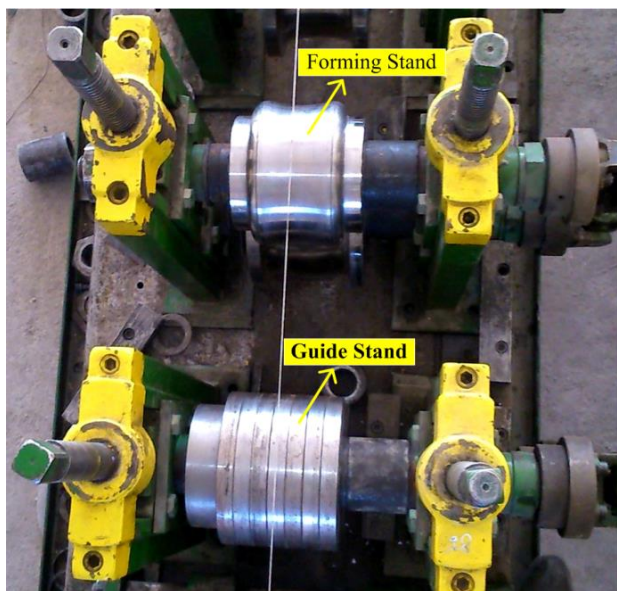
Roll forming machine of forming & joining laboratory of Tarbiat Modares university
